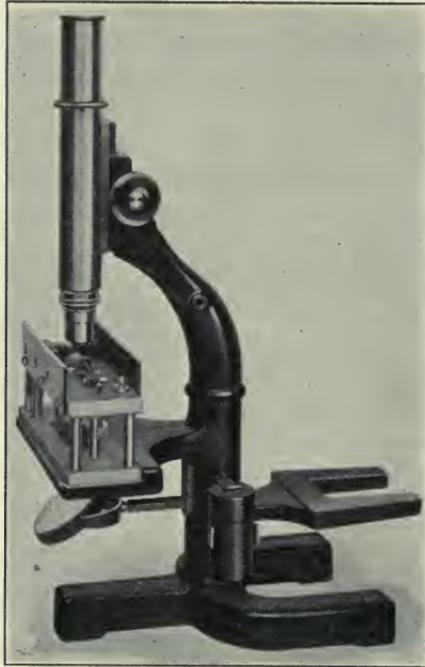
Illustrating a microscope fixture attached for visual examination of ribbon edges.
